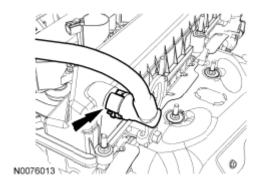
Locating Positive Battery Cable Nut Courtesy of FORD MOTOR CO.
